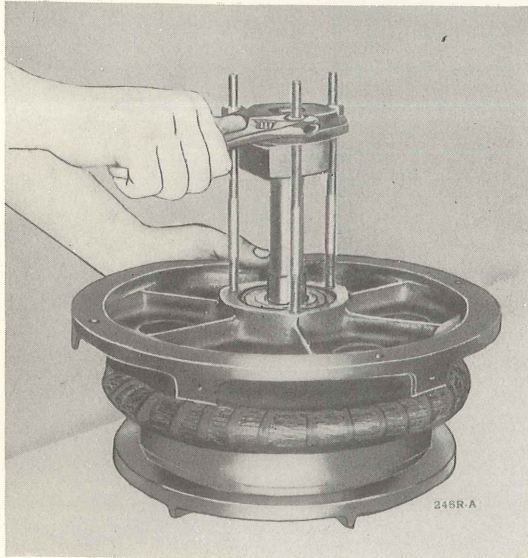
Removing the Stator Bearing, Puller Consisting of Bearing Closure, Flat Plate and Through Bolts
